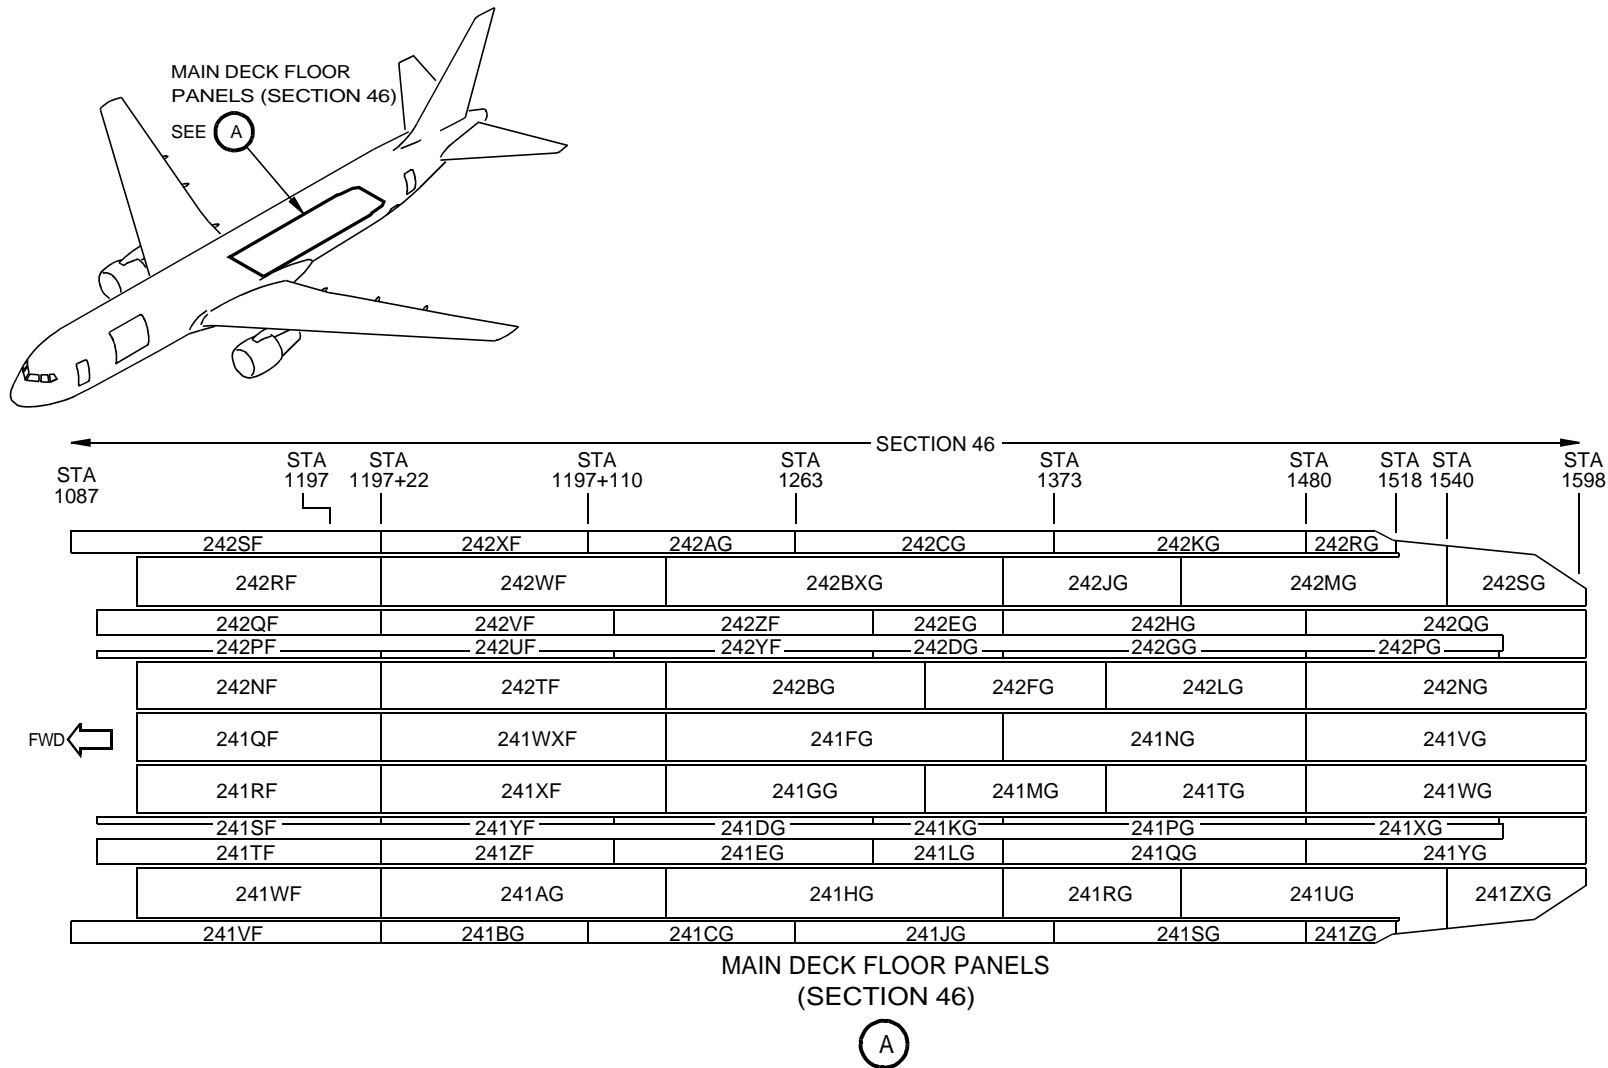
767-300BCF MAIN DECK CARGO FLOOR PANELS
